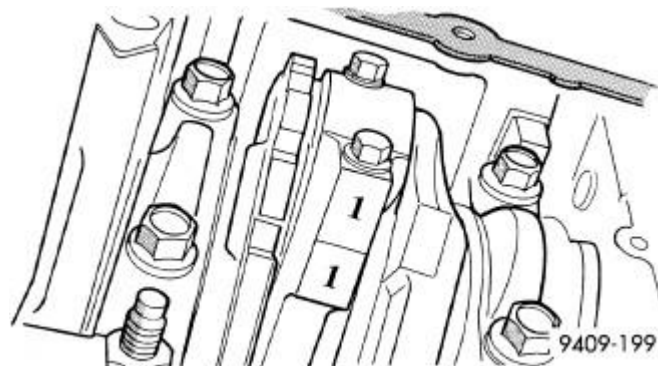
Identify Connecting Rod to Cylinder Position Typical
